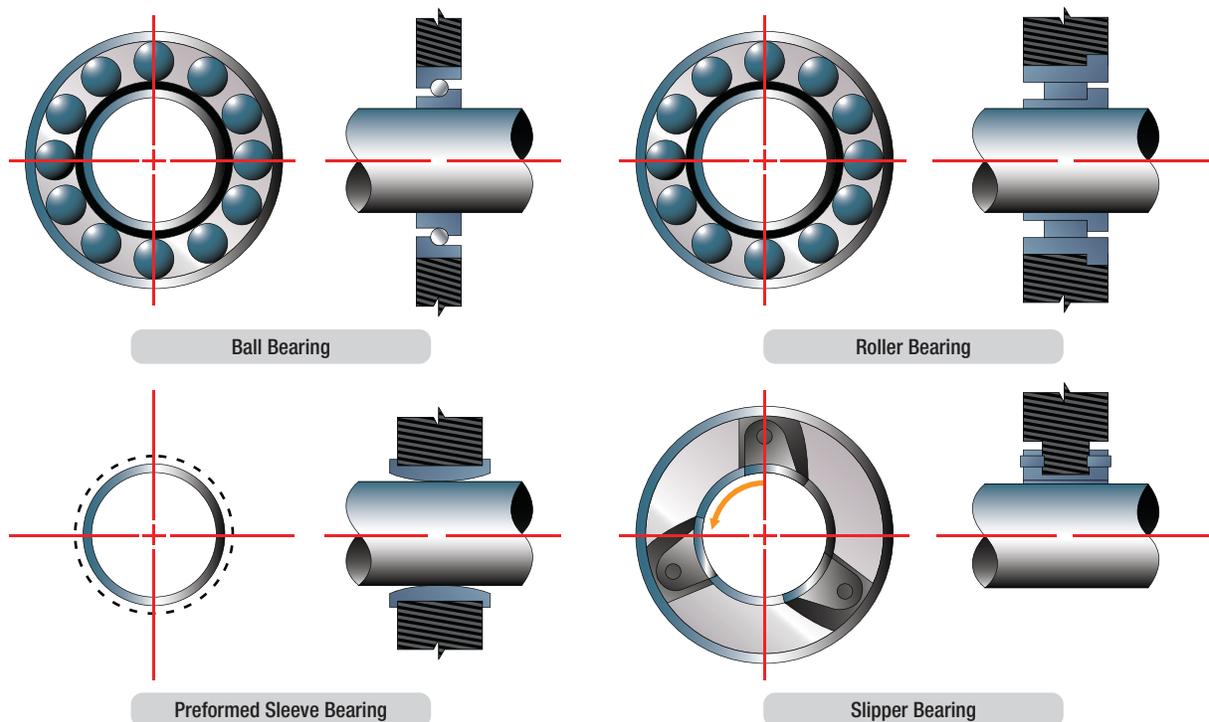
Types of main bearing used for gas turbine rotor support.
